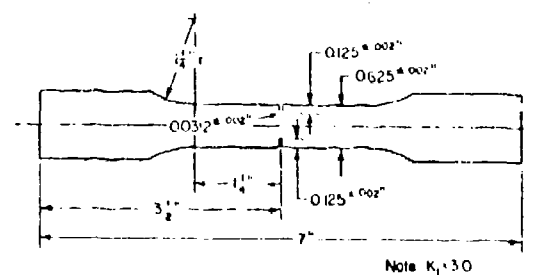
NOTCHED SHEET FATIGUE SPECIMEN
